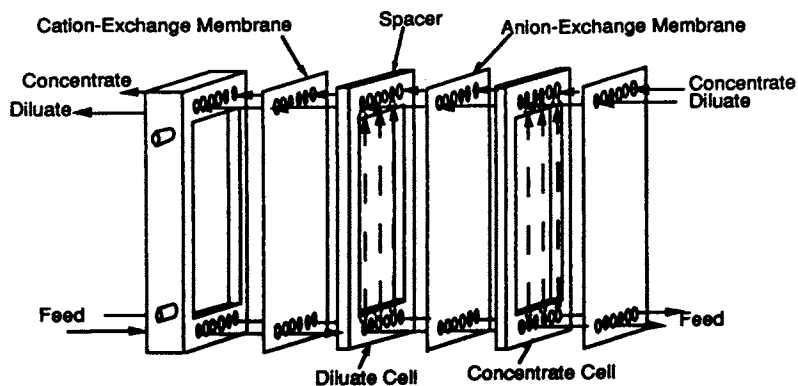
Exploded view of an electro dialysis stack using a sheet-flow cell arrangement.
